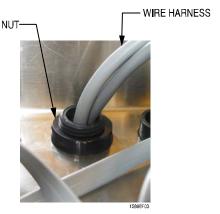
Wire harness passing through bottom of dispenser, held in place with nut
